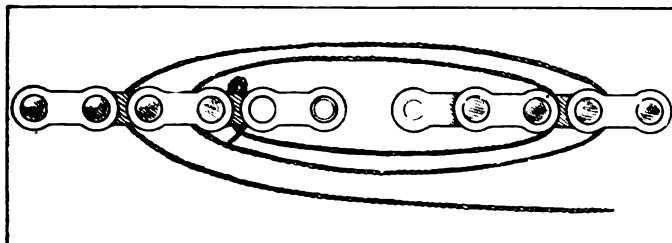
Suggestion for Utilising a Rope to Draw Ends of Roller Chain Together.
